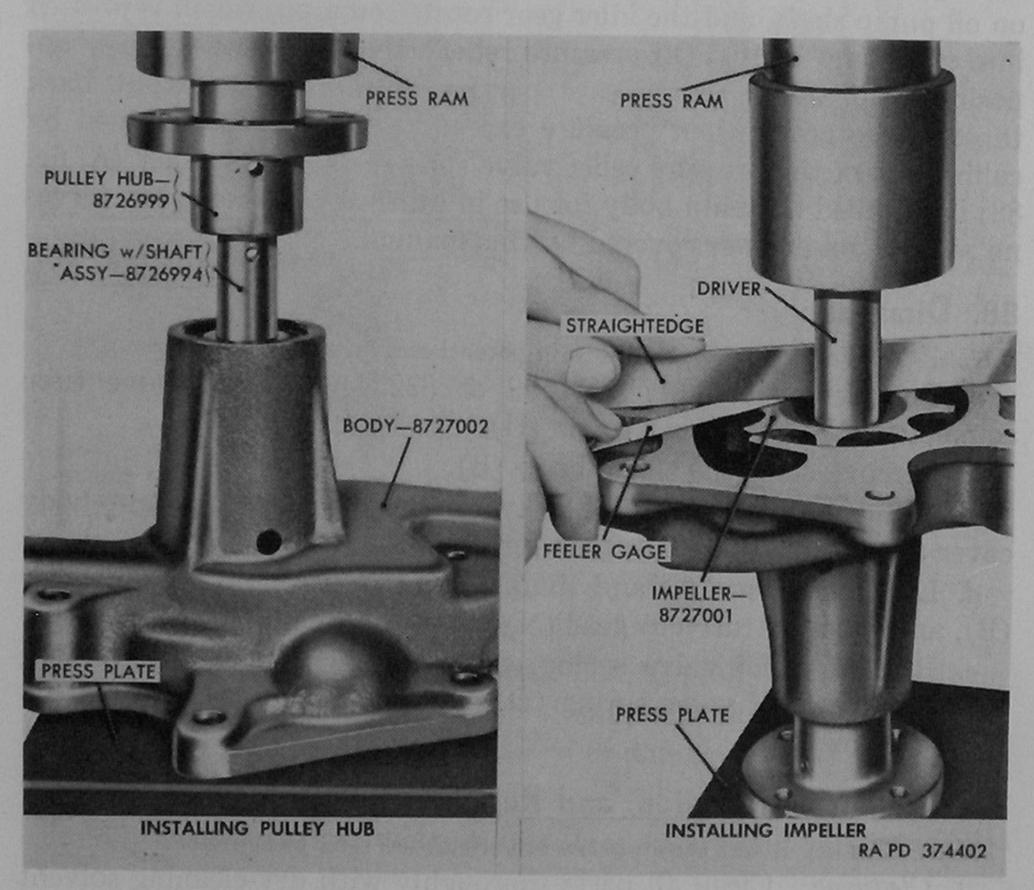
Installing water pump pulley and impeller-engine assembly 8726920.
